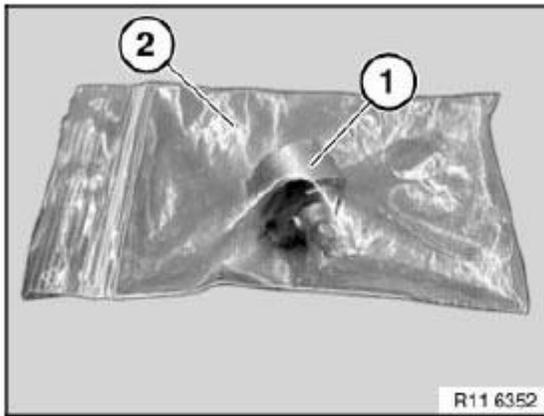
Identifying Magnet Wheel And Plastic Bag
